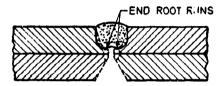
WELDING OF FLANGE PLATES AT A JUNCTION, DOUBLE-VEE BUTT WELDS
